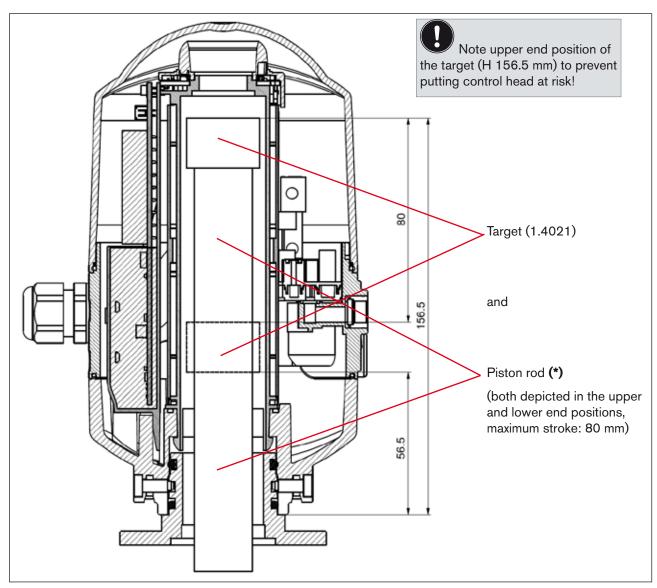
Cross-section of the control head and piston with target (in upper and lower end position)
